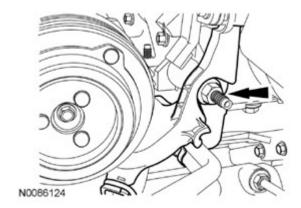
Locating A/C Compressor Electrical Connector Courtesy of FORD MOTOR CO.
